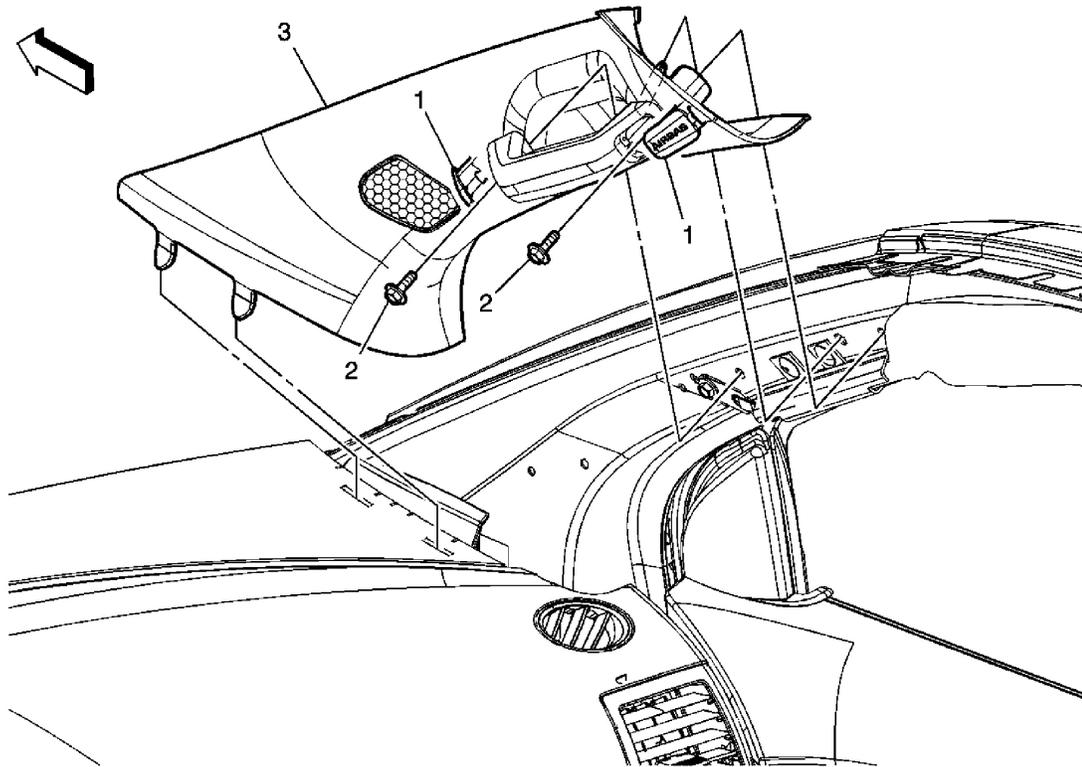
Identifying Windshield Garnish Molding - Right Side
